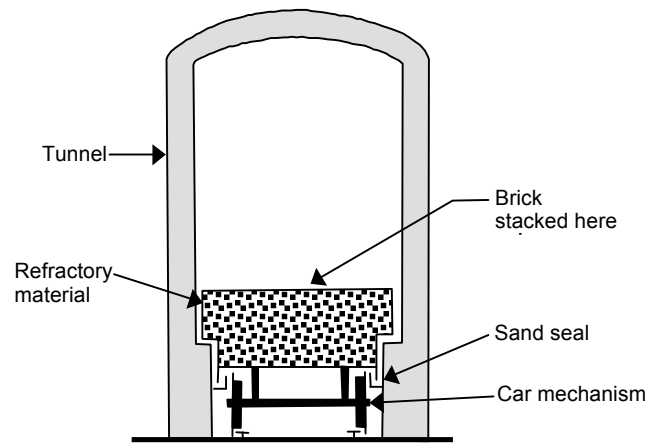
Cross-section of Tunnel Kiln (adapted from Rhodes, 1968)
